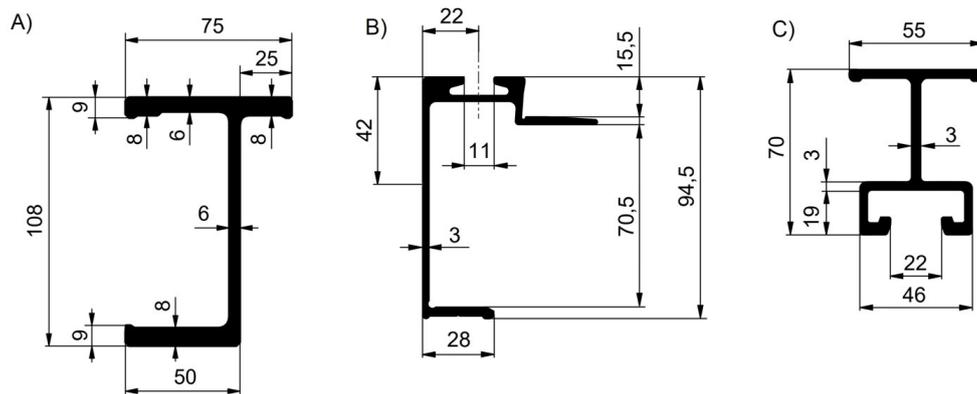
Examples of cross sections of structural aluminum profiles A - longitudinal beam, B - perimeter beam, C - crossbeam
